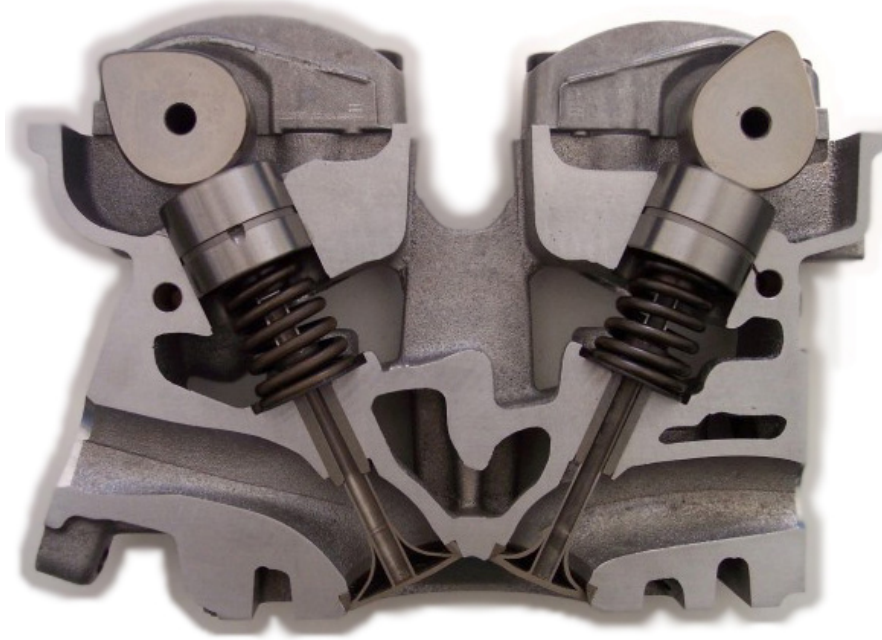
An Example DOHC Setup. Wheels of Italy 2007. The left hand side shows an intake valve and the right hand side shows an exhaust valve. The combustion chamber has not been included but would be below the valves.
